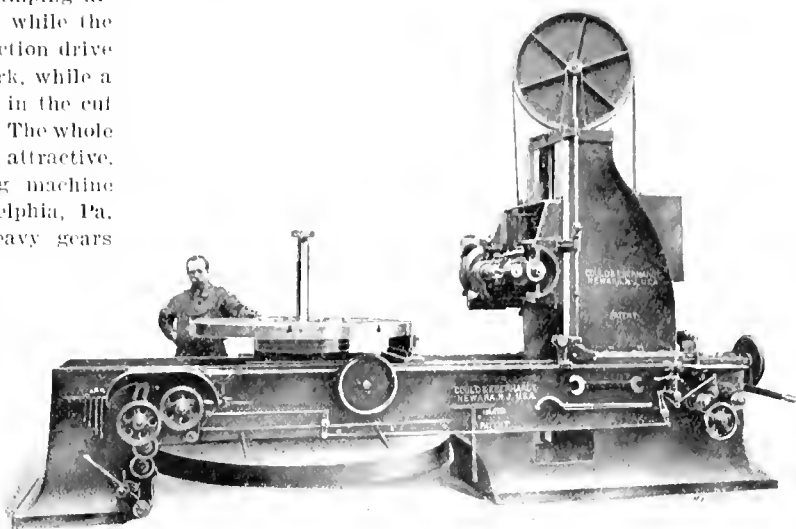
The Horizontal Type of Gear-cutter, as built by Gould & Eberhardt.
